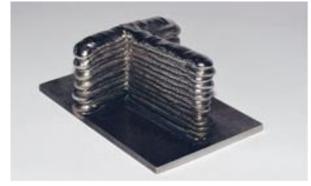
Wire Arc Additive Manufacturing WAAM hardware currently uses Welding power source, Welding torches and wire or rod feeding system. The designing can be monitored by computer aided design and product can be developed by using computer numerical controlled gantries.
